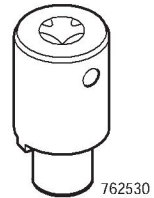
892/01151 Injector Sleeve Fitting/Removing Tool
